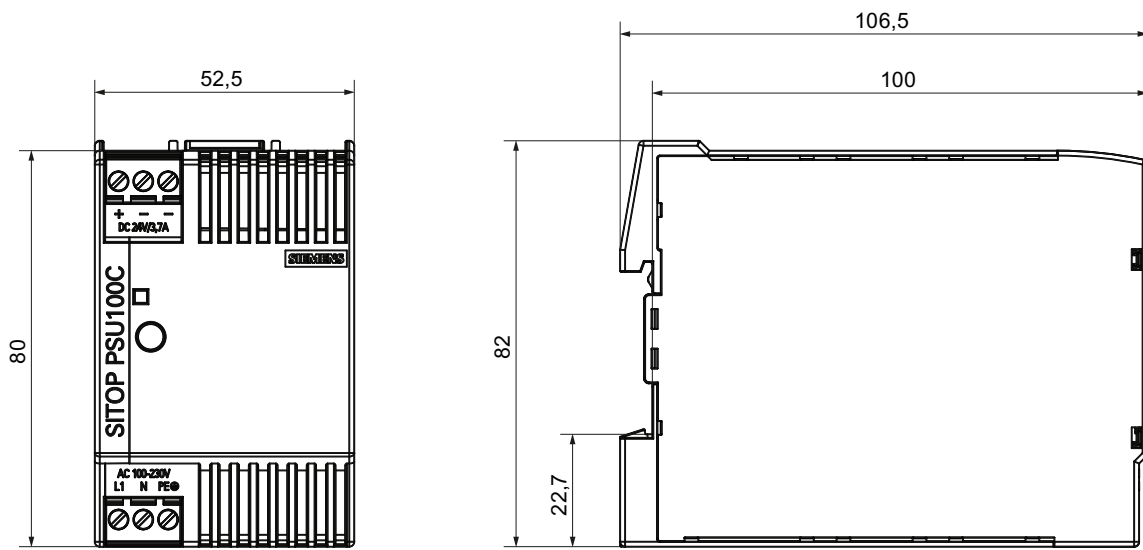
Dimension drawing 6EP1332-5BA20, 6EP1332-5BA10, 6EP1322-5BA10
